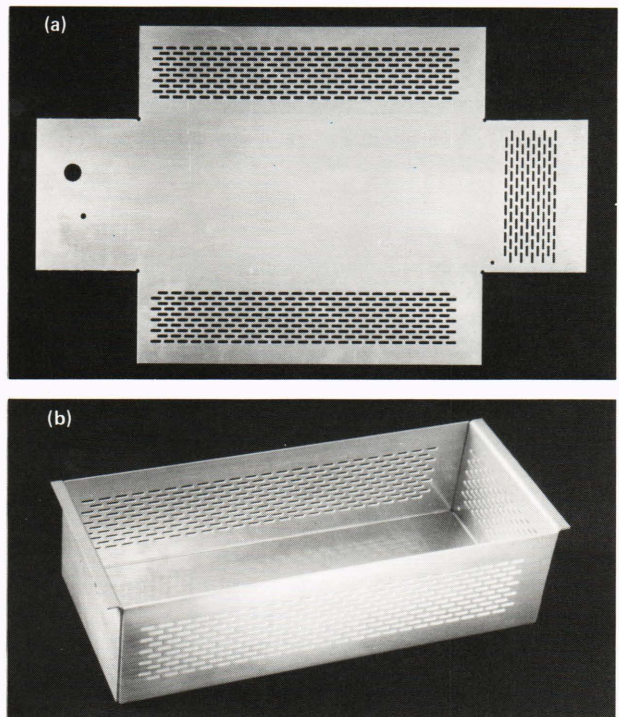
Chassis fabricated on a numerical control Amada-Pega turret punch. (a) Before forming and (b) after forming.
